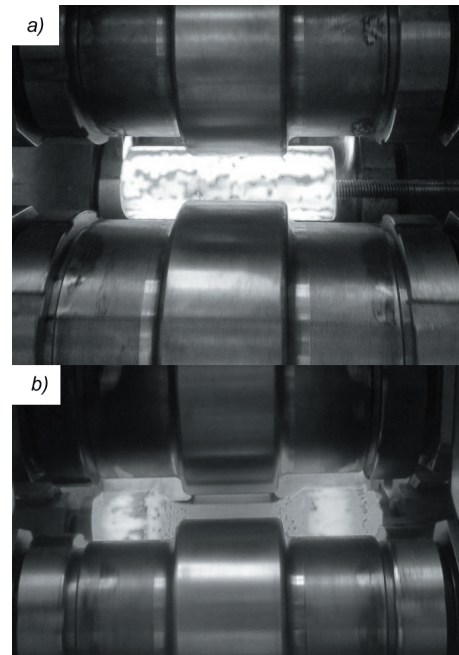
Rotary compression process for producing hollow shafts; a) start of the process, and b) end of the process
